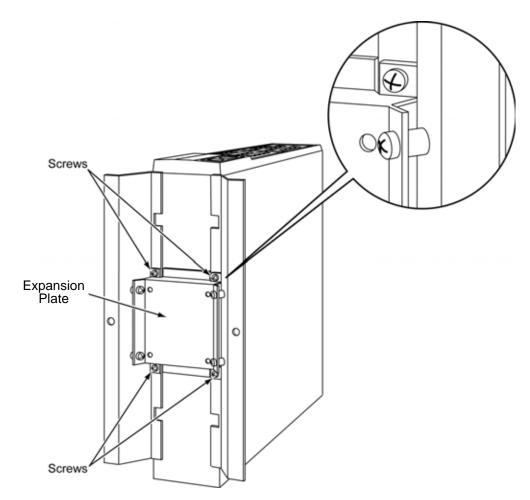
Secure CHS2U-US Chassis to CHS2U STAND KIT with Screws
